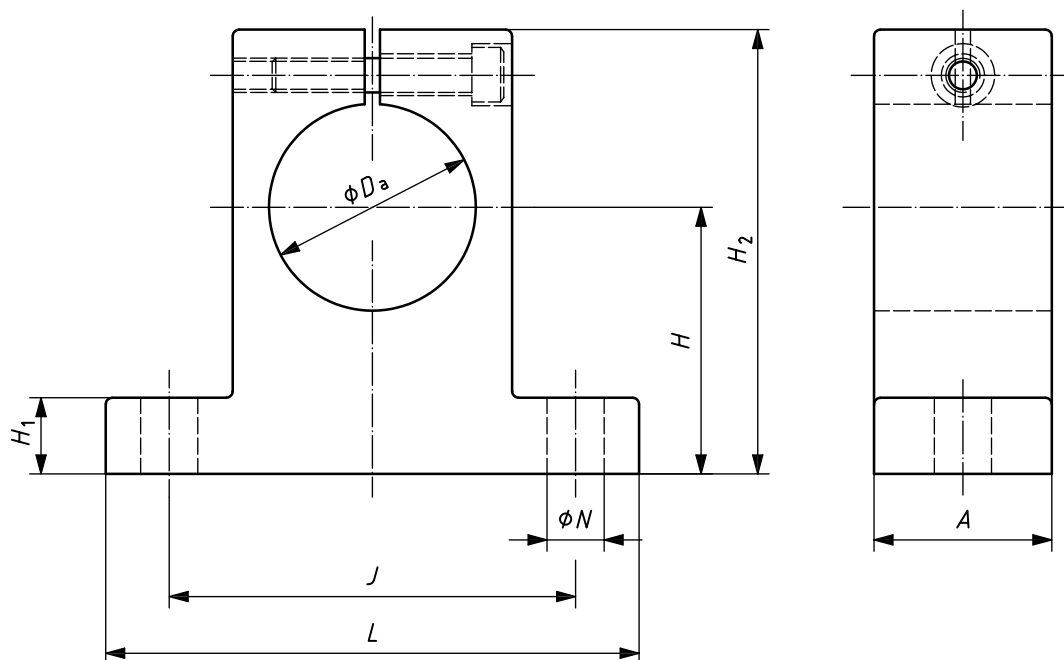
Flanged shaft support blocks for series 5 sleeve type linear ball bearings
